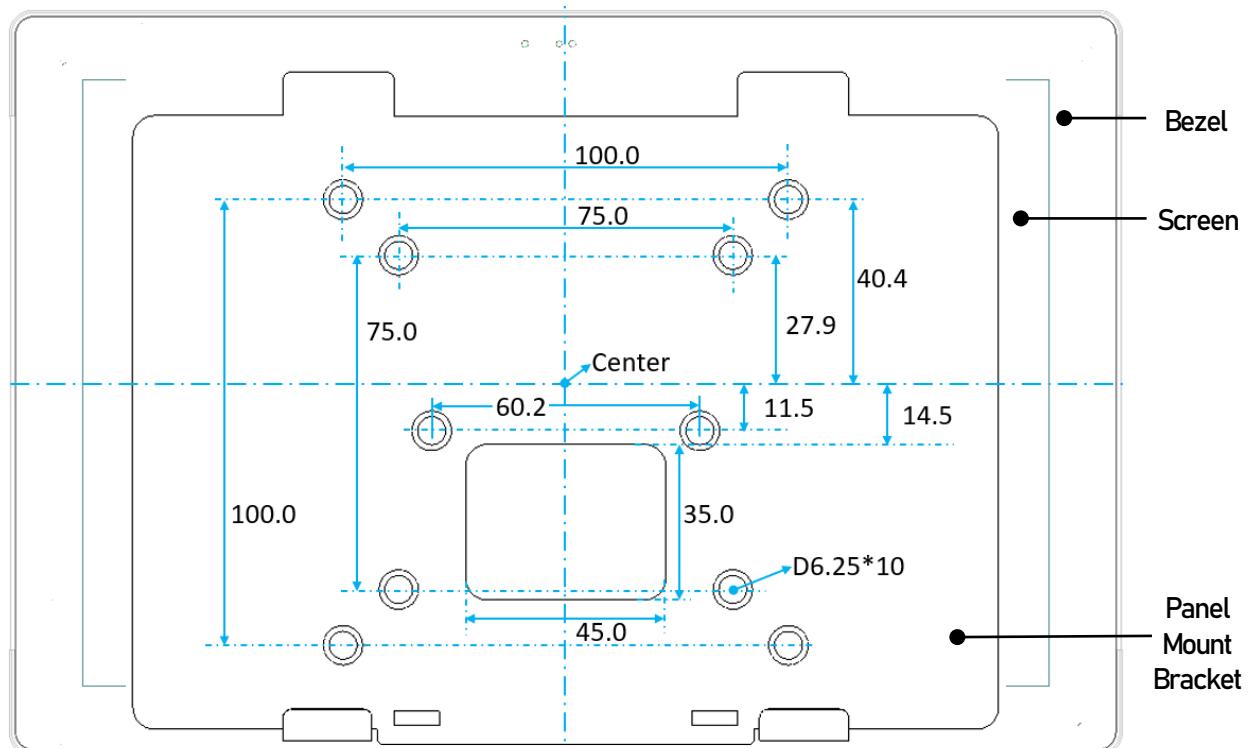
Panel Mount Bracket Drill Holes Drawings (Front View)
